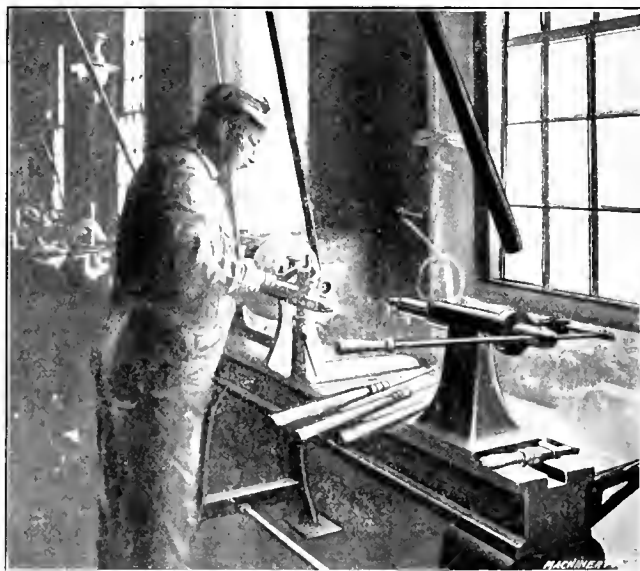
Another View showing the Position of the Spinner and the Way the Tool is held when forming the Metal
